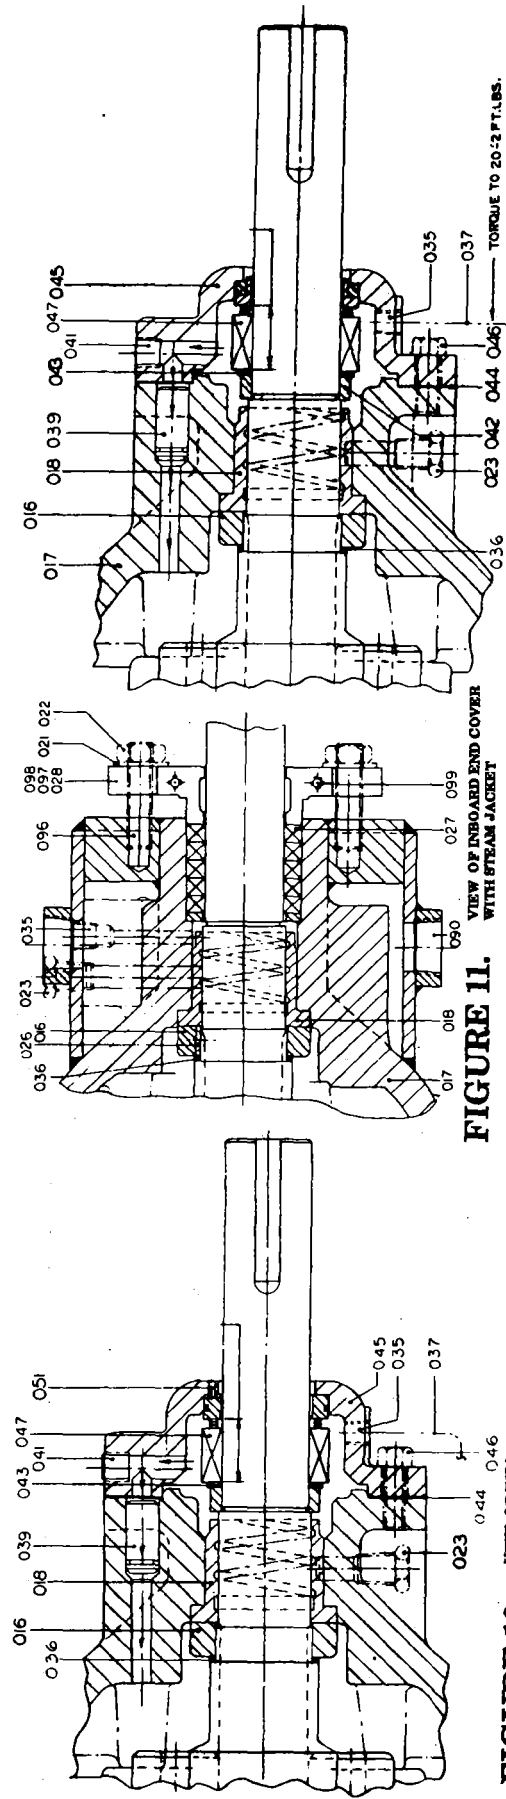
VIEW OF INBOARD END COVER, SEAL WITH O-RING SEAT.
